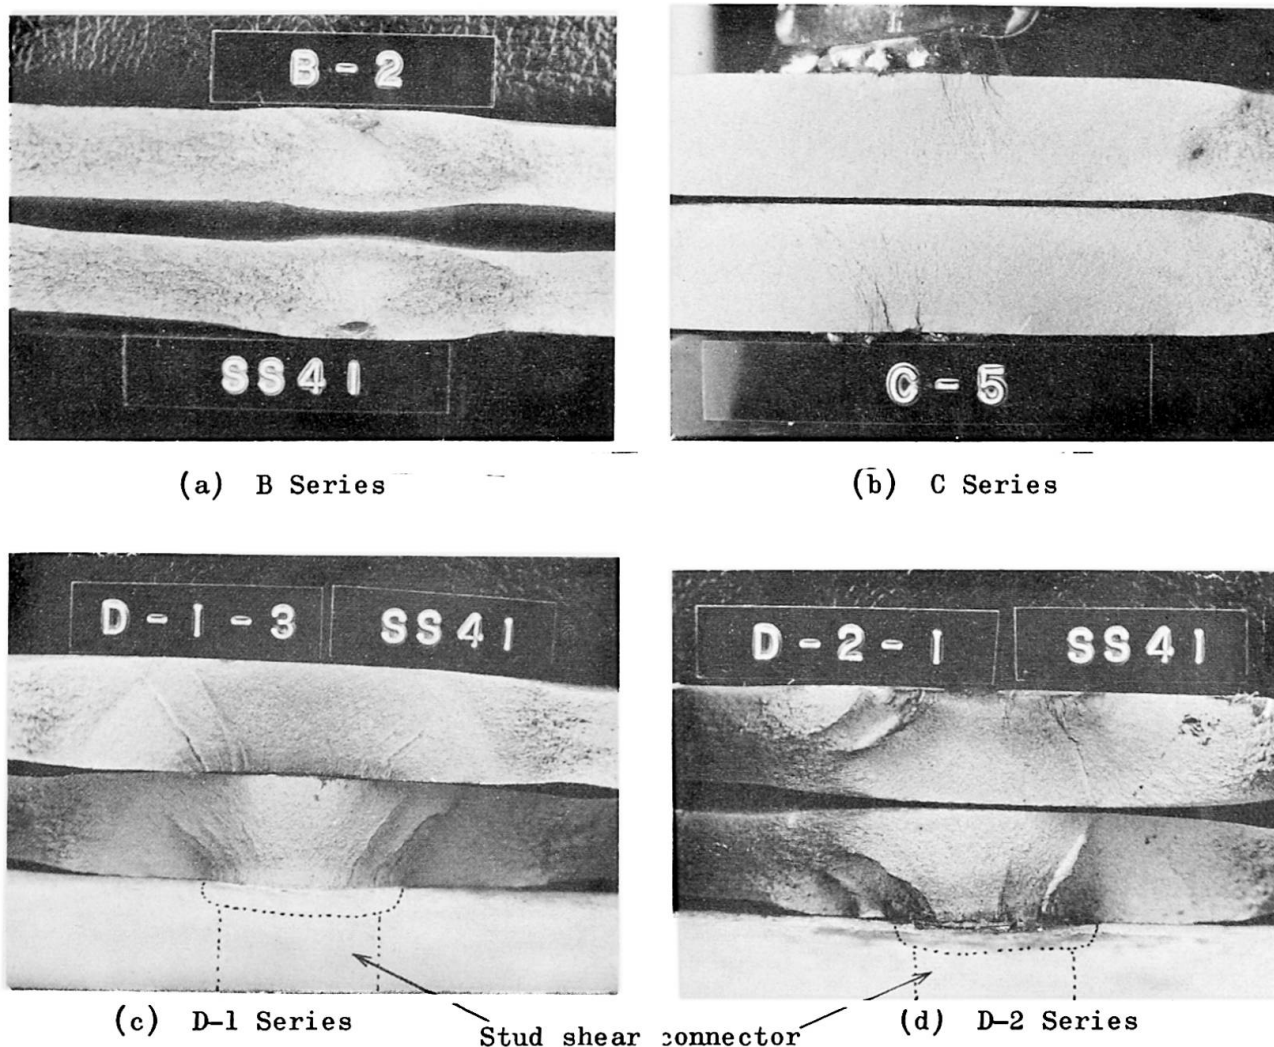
Typical fatigue fracture surfaces in each test series.
